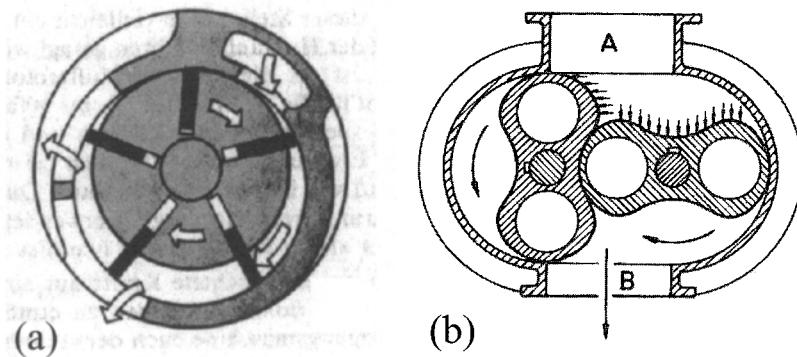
Pneumatic rotary motors: (a) vane motor; (b) roots motor
